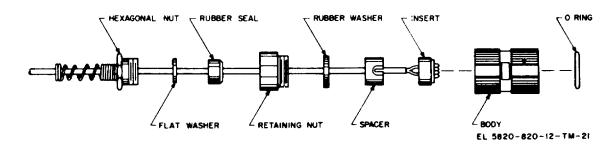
Loudspeaker LS-610/UR connector 1P3 and 1P4 assembly.
